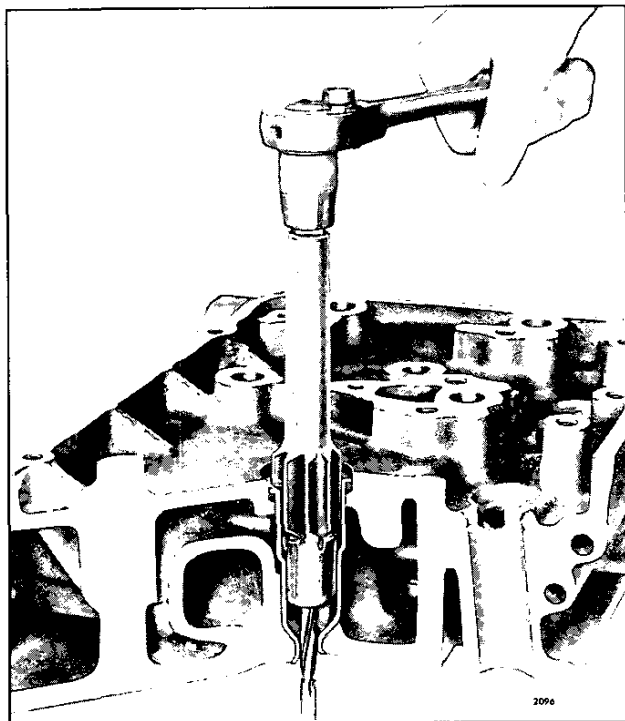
Reaming Injector Tube for Injector Body Nut and Spray Tip Using Tool J 22525-1
